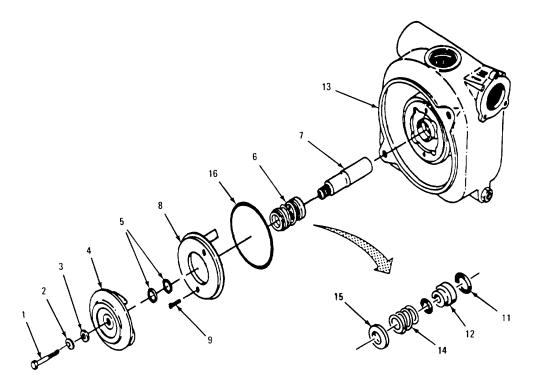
Replacing impeller, Shaft Seal, and Shaft Adapter
